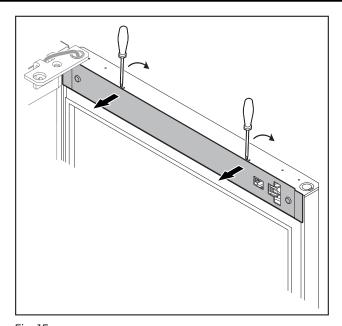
▶ Unlatch the cover with a small screwdriver and take it
